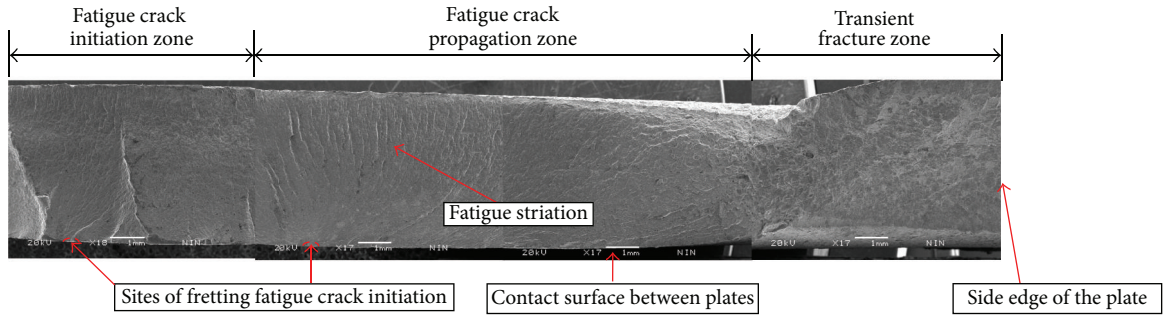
Illustration of fatigue fracture surfaces and fretting damage at the contact surfaces.
